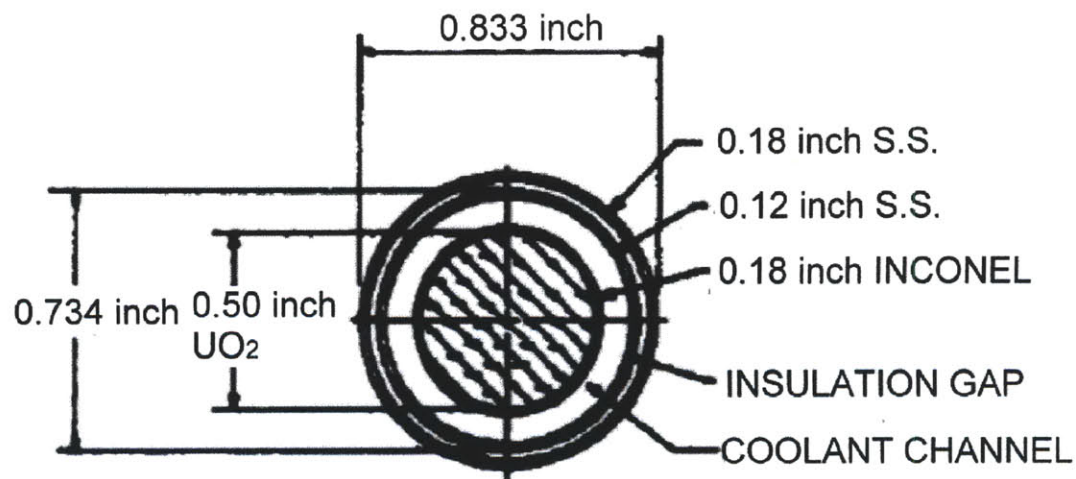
Perspective of the BONUS superheater fuel assembly [39]
